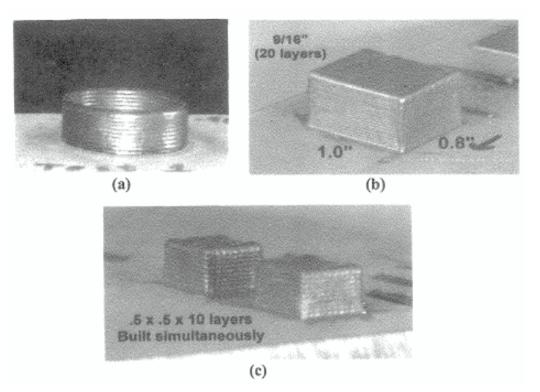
(a) cross-sectional micrograph of uni-directional fabrication, (b) block fabrication with wire detachment between layers, and (c) complex part fabrication with start and stop capability in each layer.
